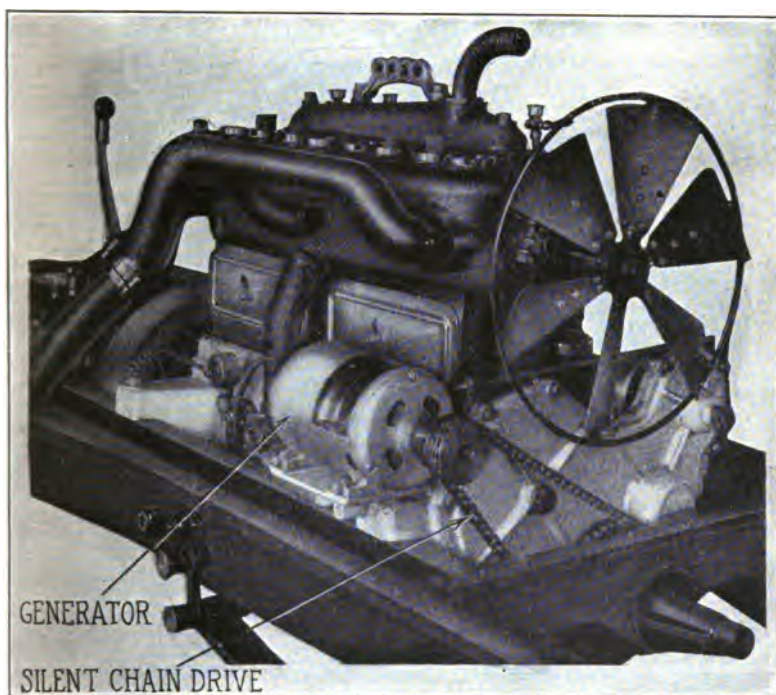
How Gray & Davis Generator is Driven by Silent Chain Connection with Engine Crankshaft.
